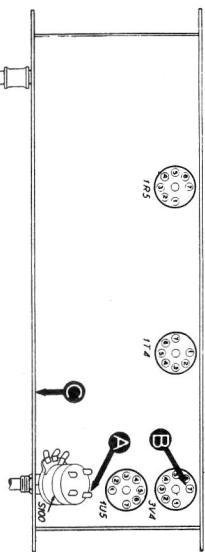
Bottom View, Showing Section 1 Test Points TP-5554A
